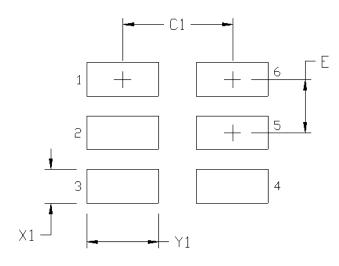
Si545 (3.2×5 mm) PCB Land Pattern
